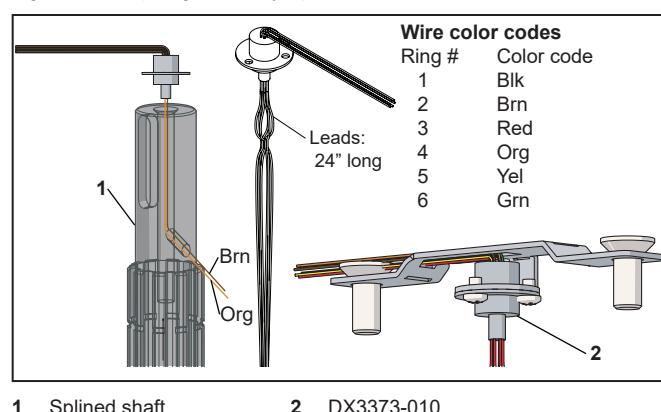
Slip ring assembly, splined shaft wires
